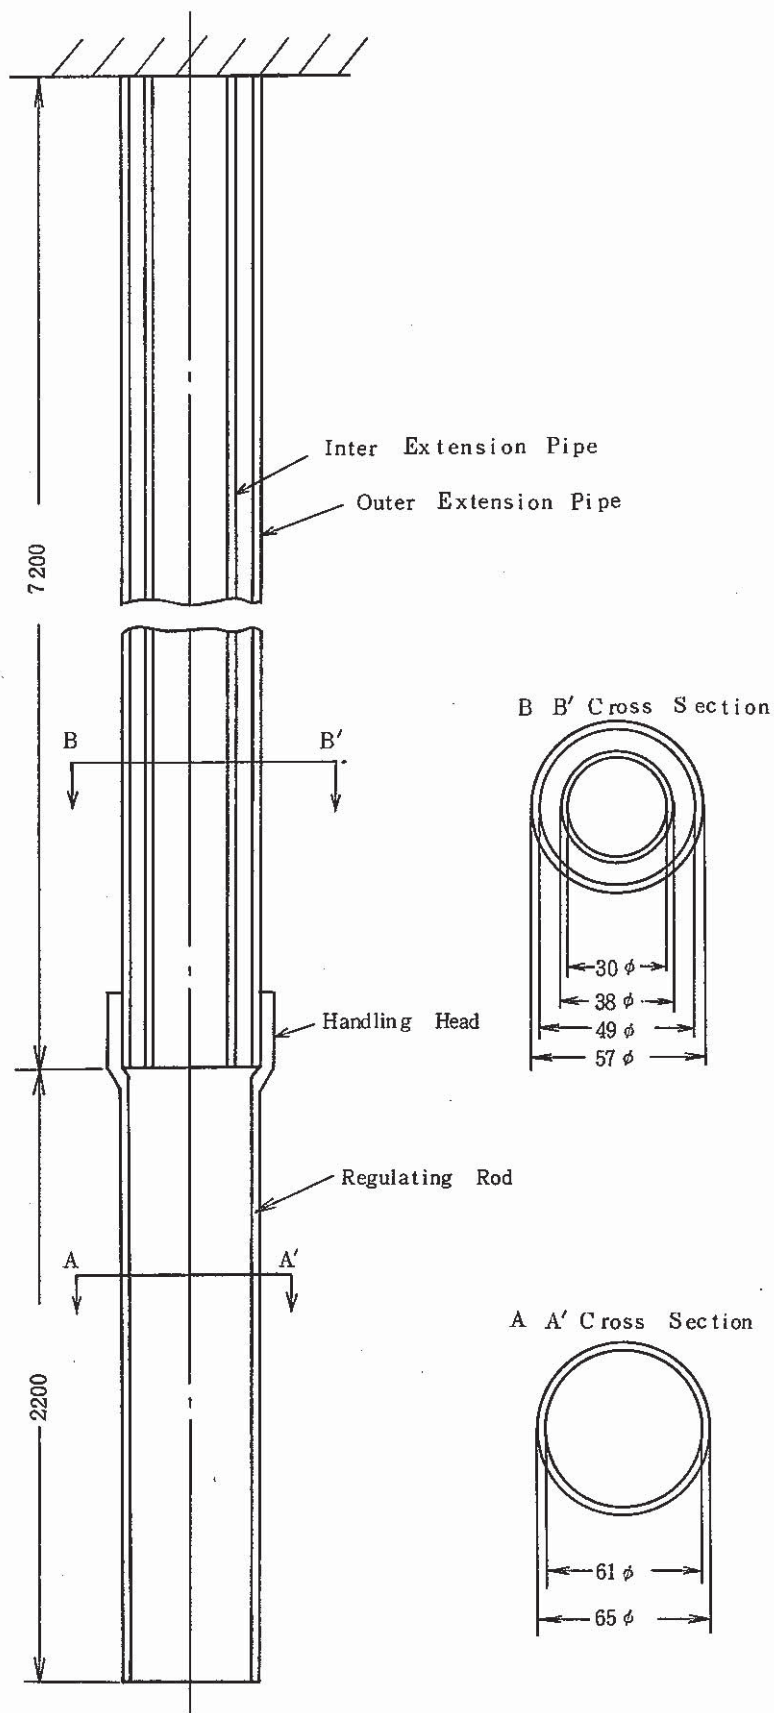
Extension Pipe, Handling Head and Regulating Rod
